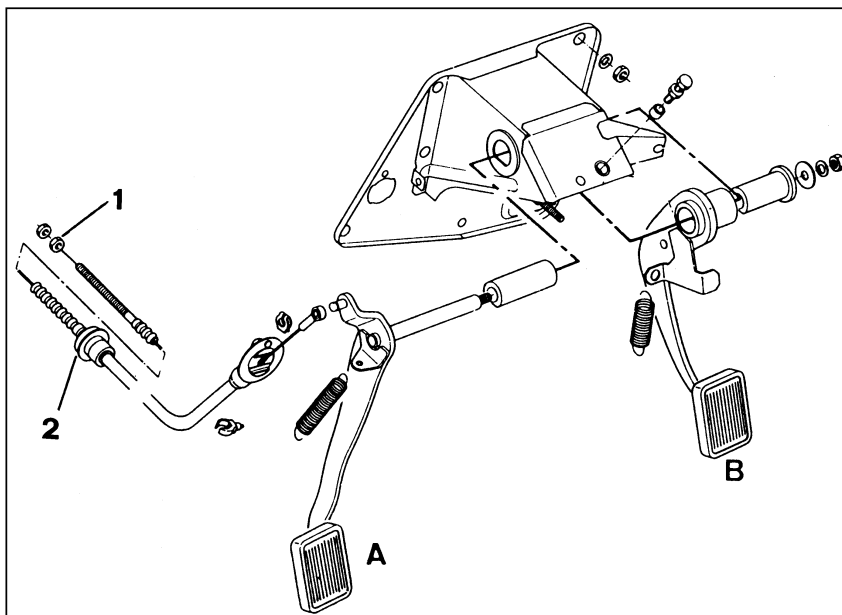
Arrangement of the clutch (A) and brake pedal (B): 1 Adjusting and lock nut for the clutch cable - 2 Cable sleeve anchoring.
